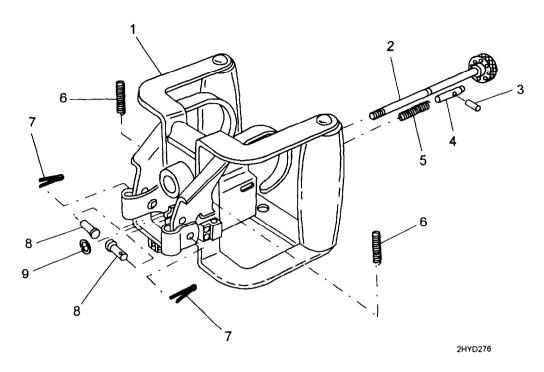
Group 02 Grip and Trigger Assembly (M60D only), PN 11699751
